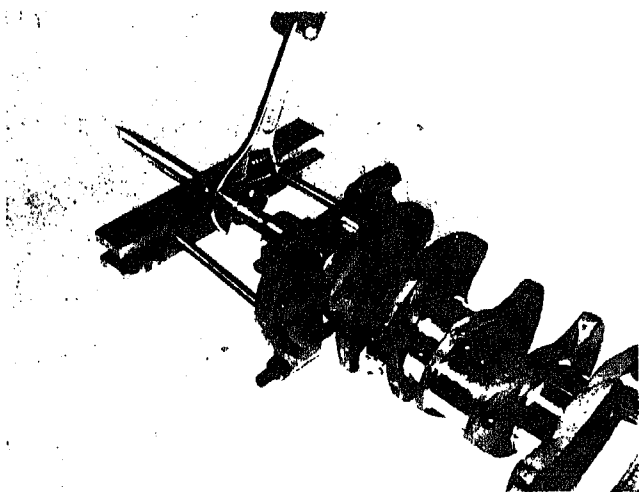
Pulling crankshaft gear with ring-type puller
